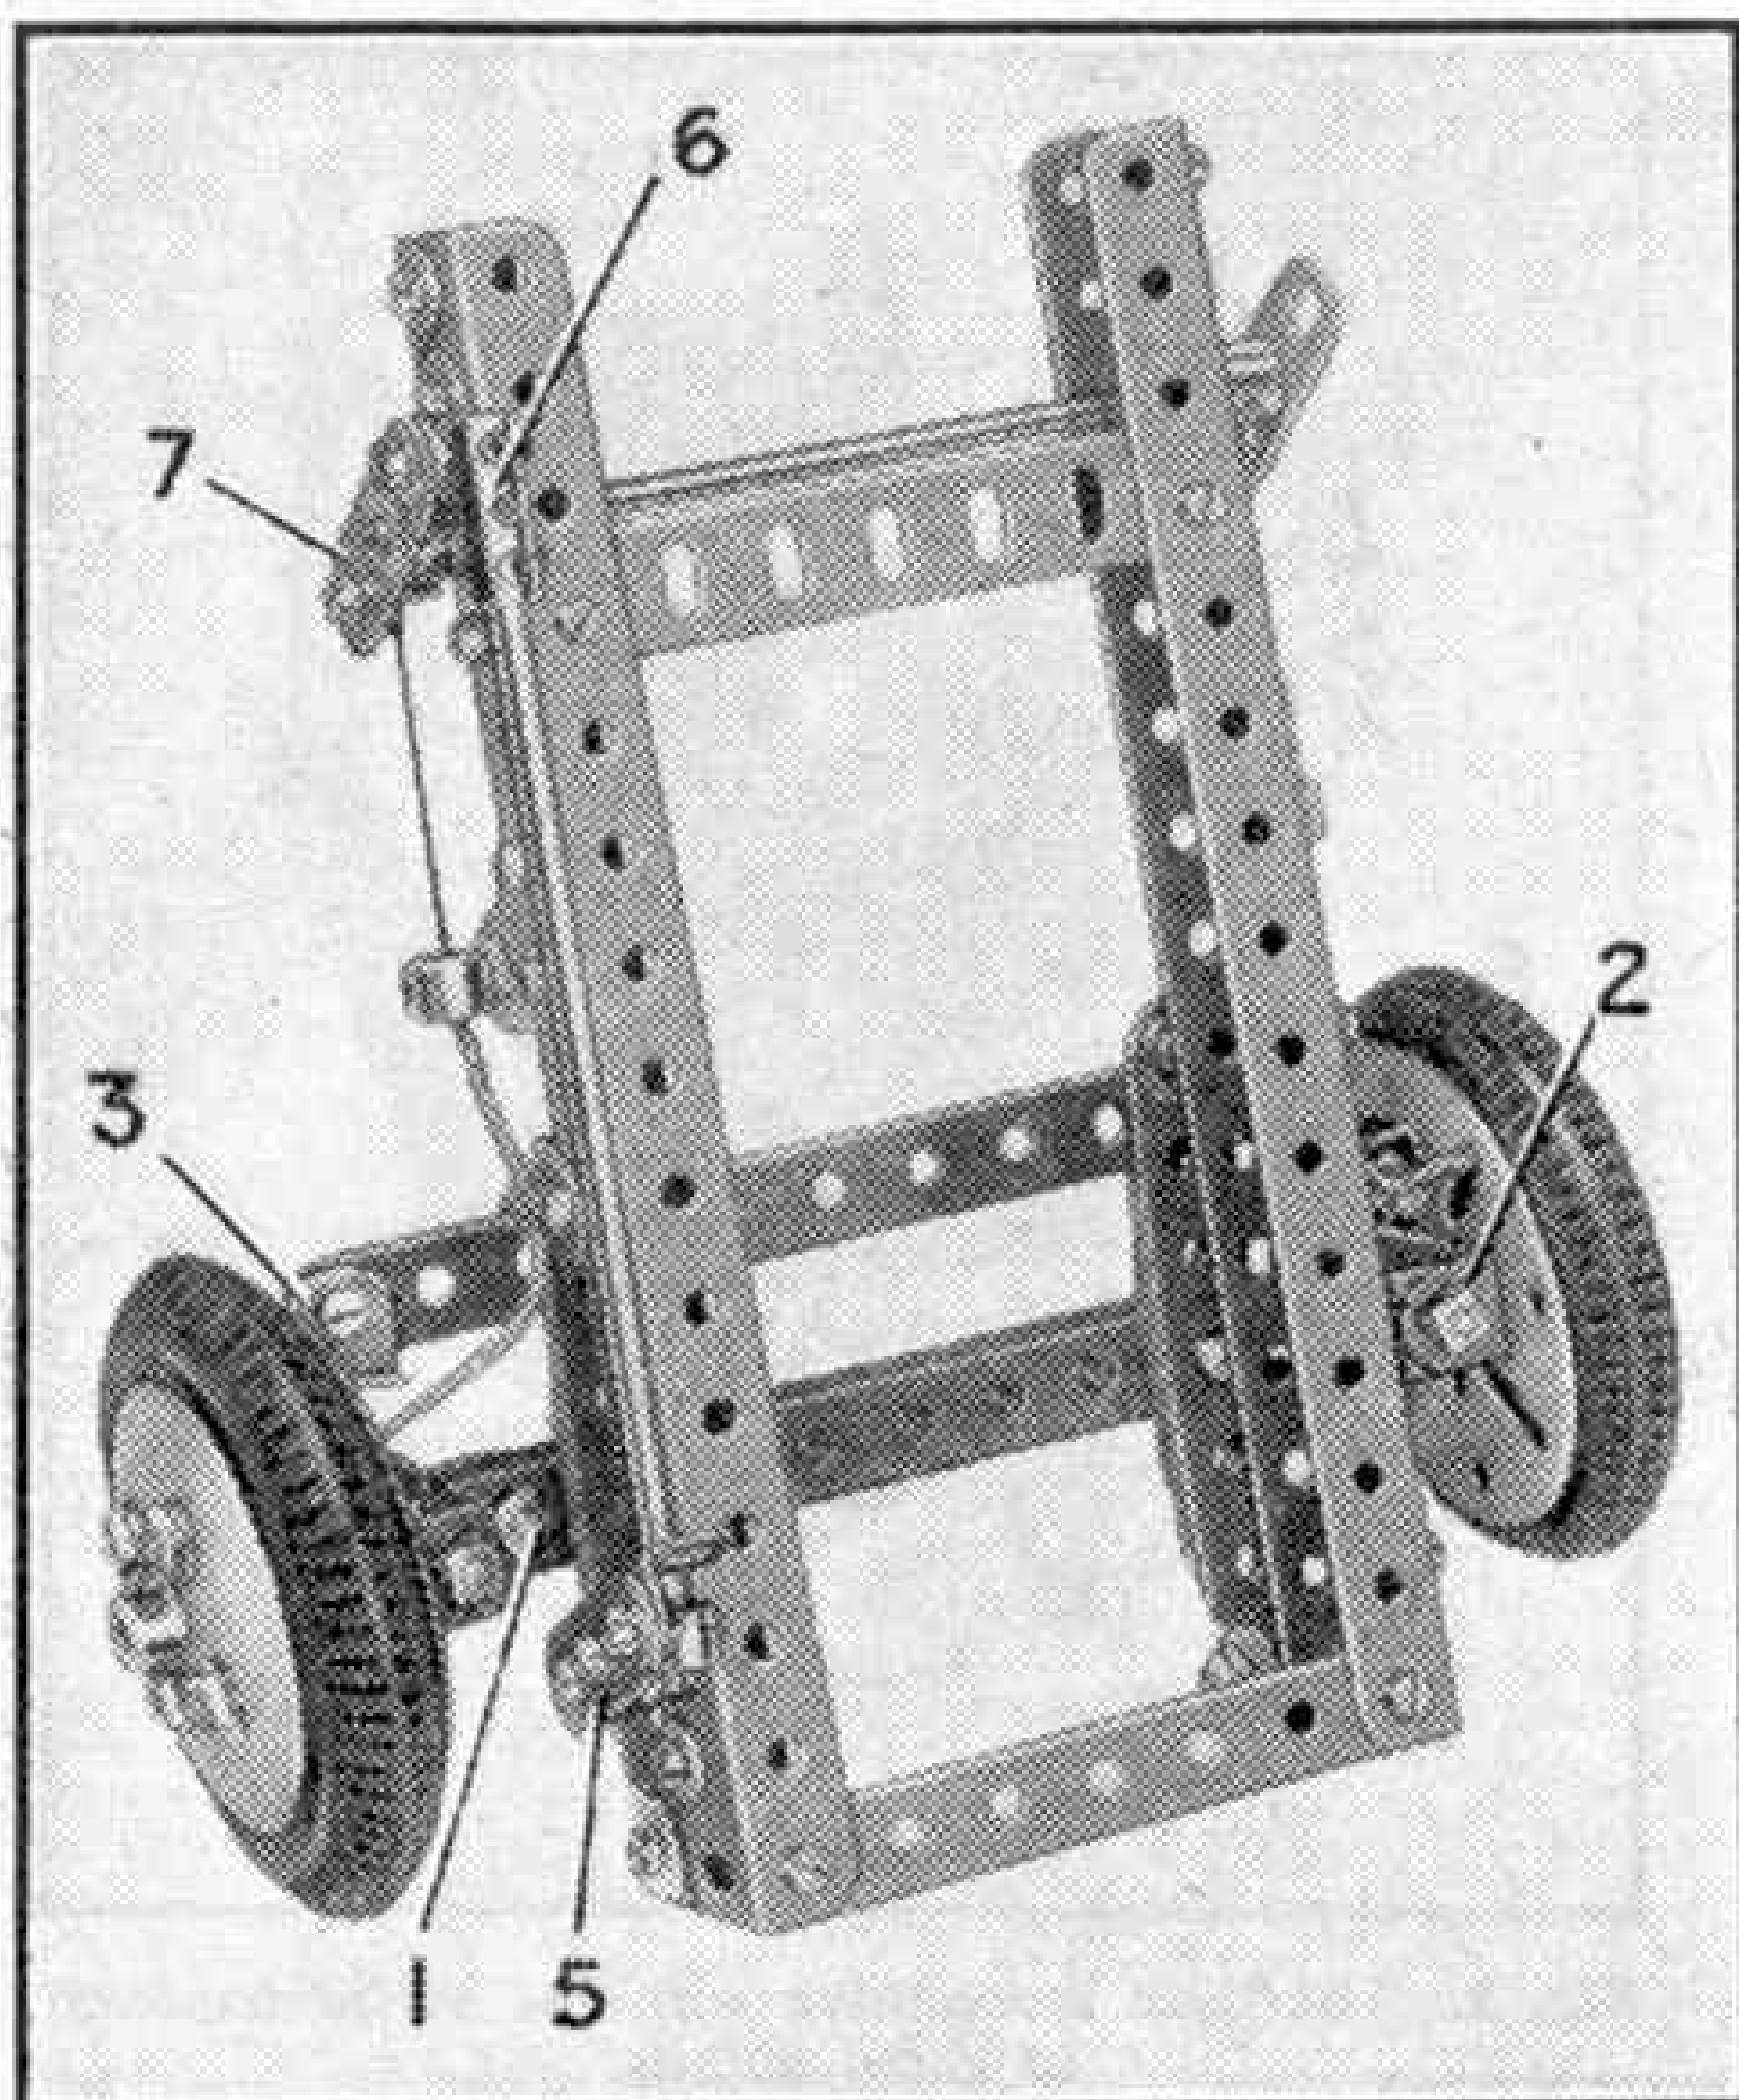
A front axle unit incorporating internal expanding brakes, designed for use in model motor lorries.
